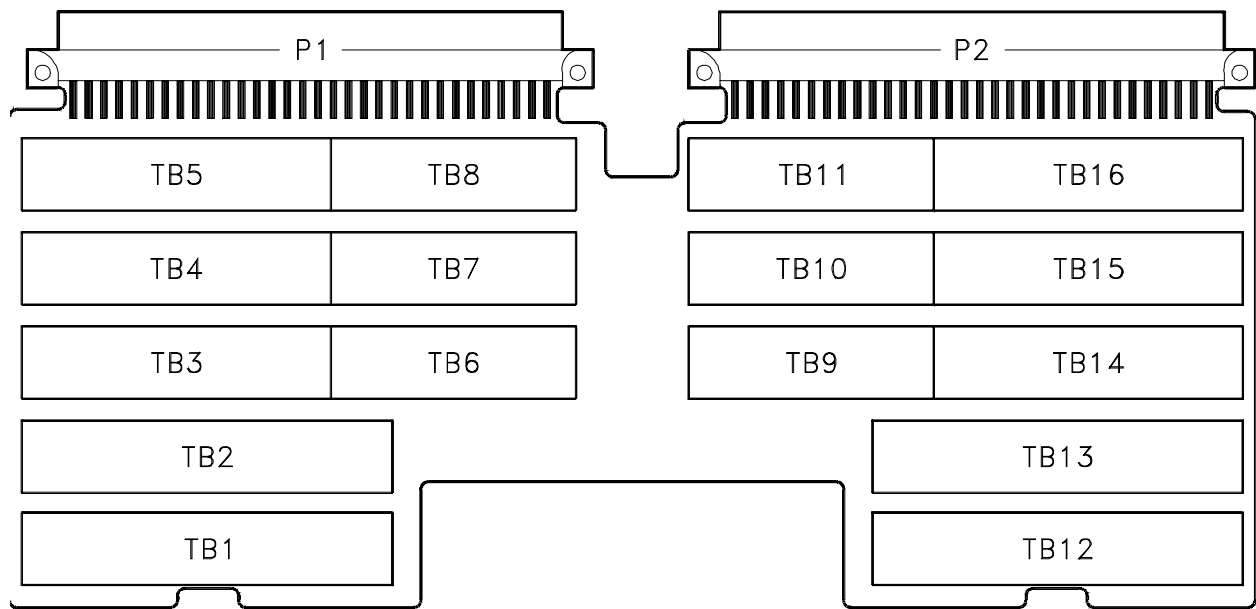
E1400-80001 Terminal Module Case Assembly
